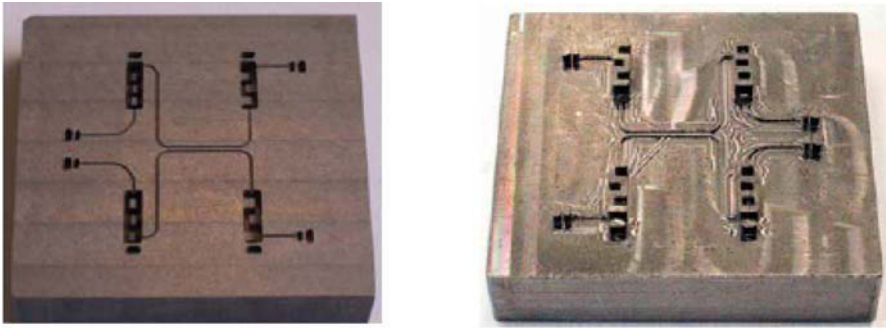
Micro-fluidic tooling. Aluminum master geometry for subsequent electroforming (left); hardened tool steel insert (right).
